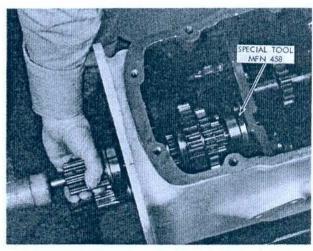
Installing Front Bearing on Main Shaft (Using Special Tool MFN 458)
